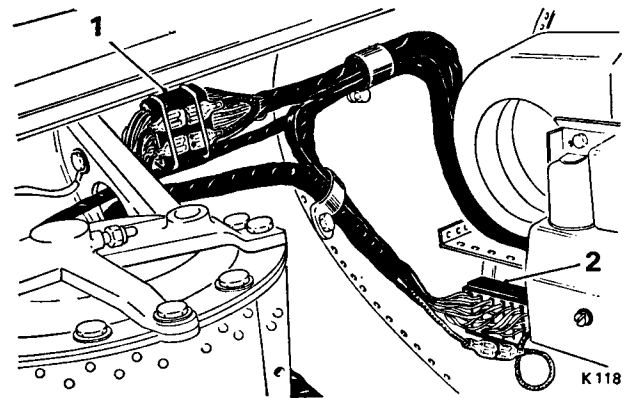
ENGINE LOOM PLUG AND SOCKET
